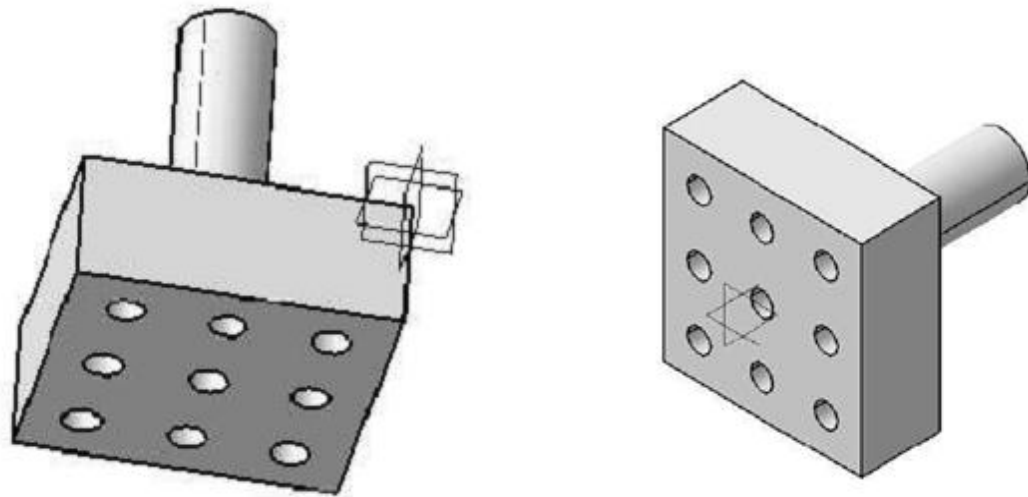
Design of Cu tool with 3×3 array of holes
